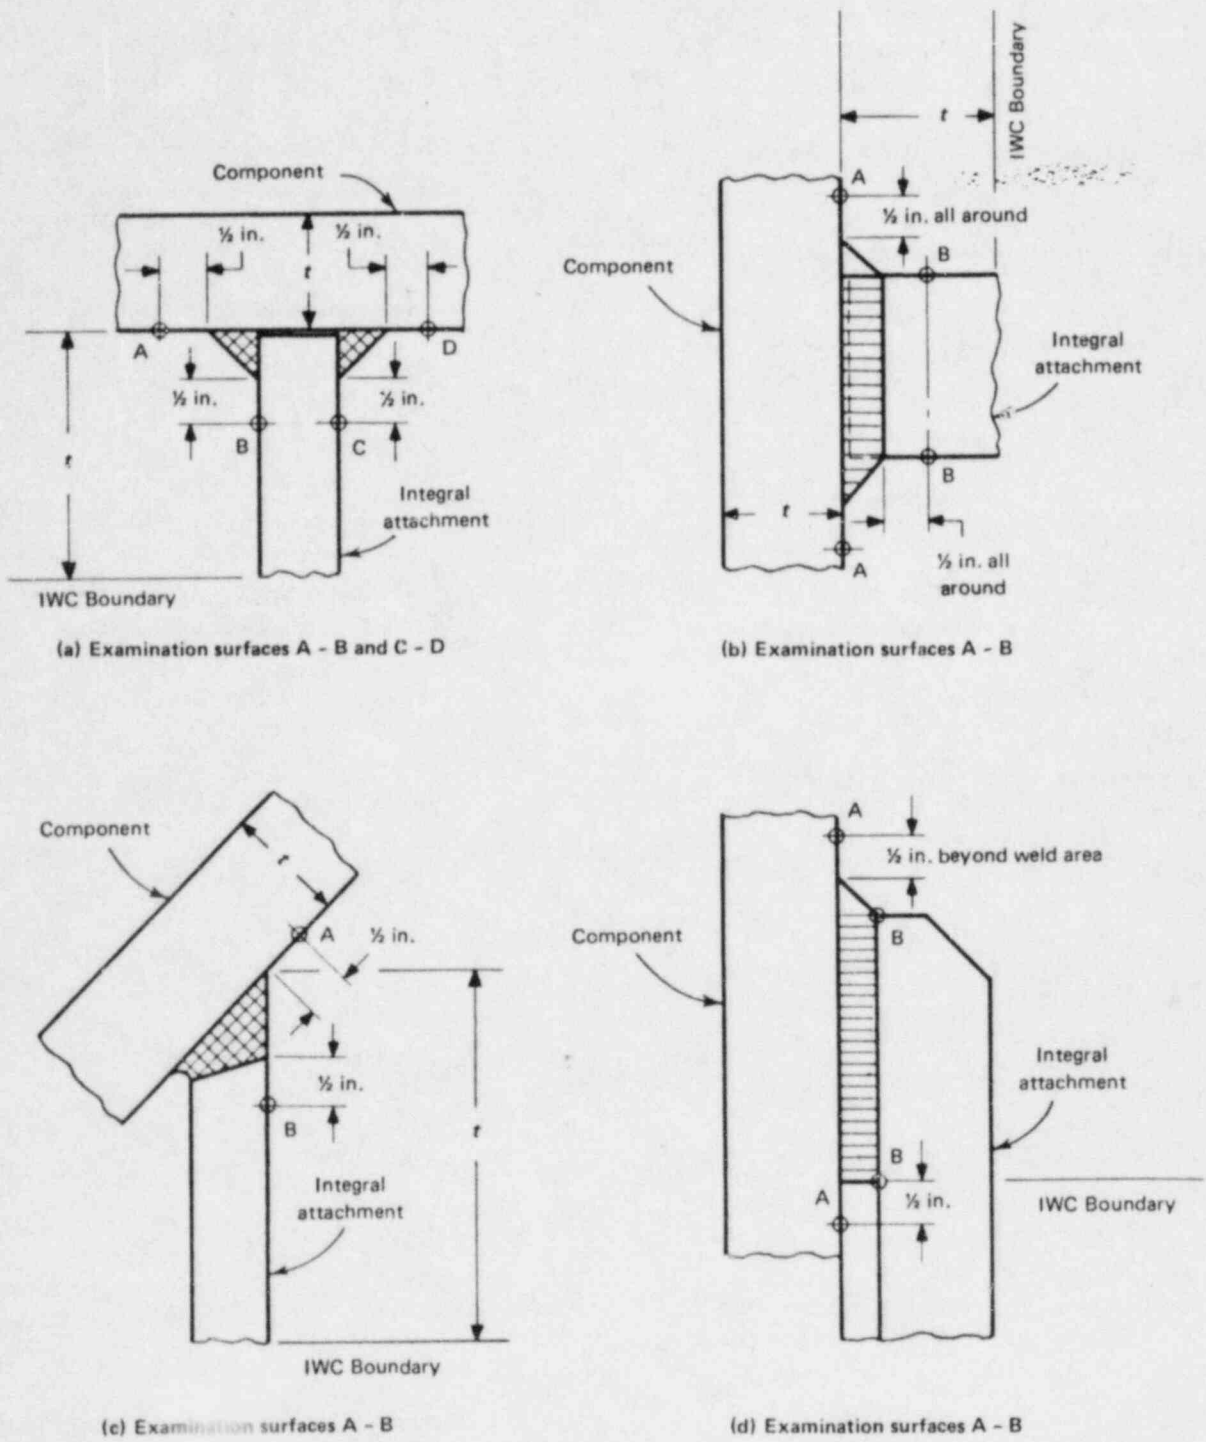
INTEGRALLY WELDED ATTACHMENTS
